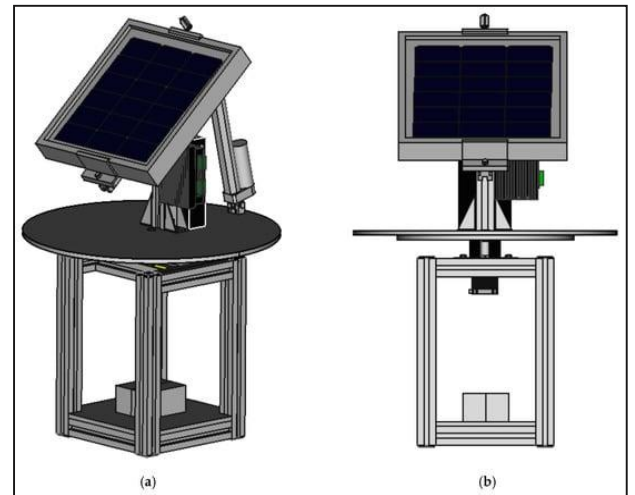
D Design of Solar Tracker (a) Viewpoint, and (b) Front View
